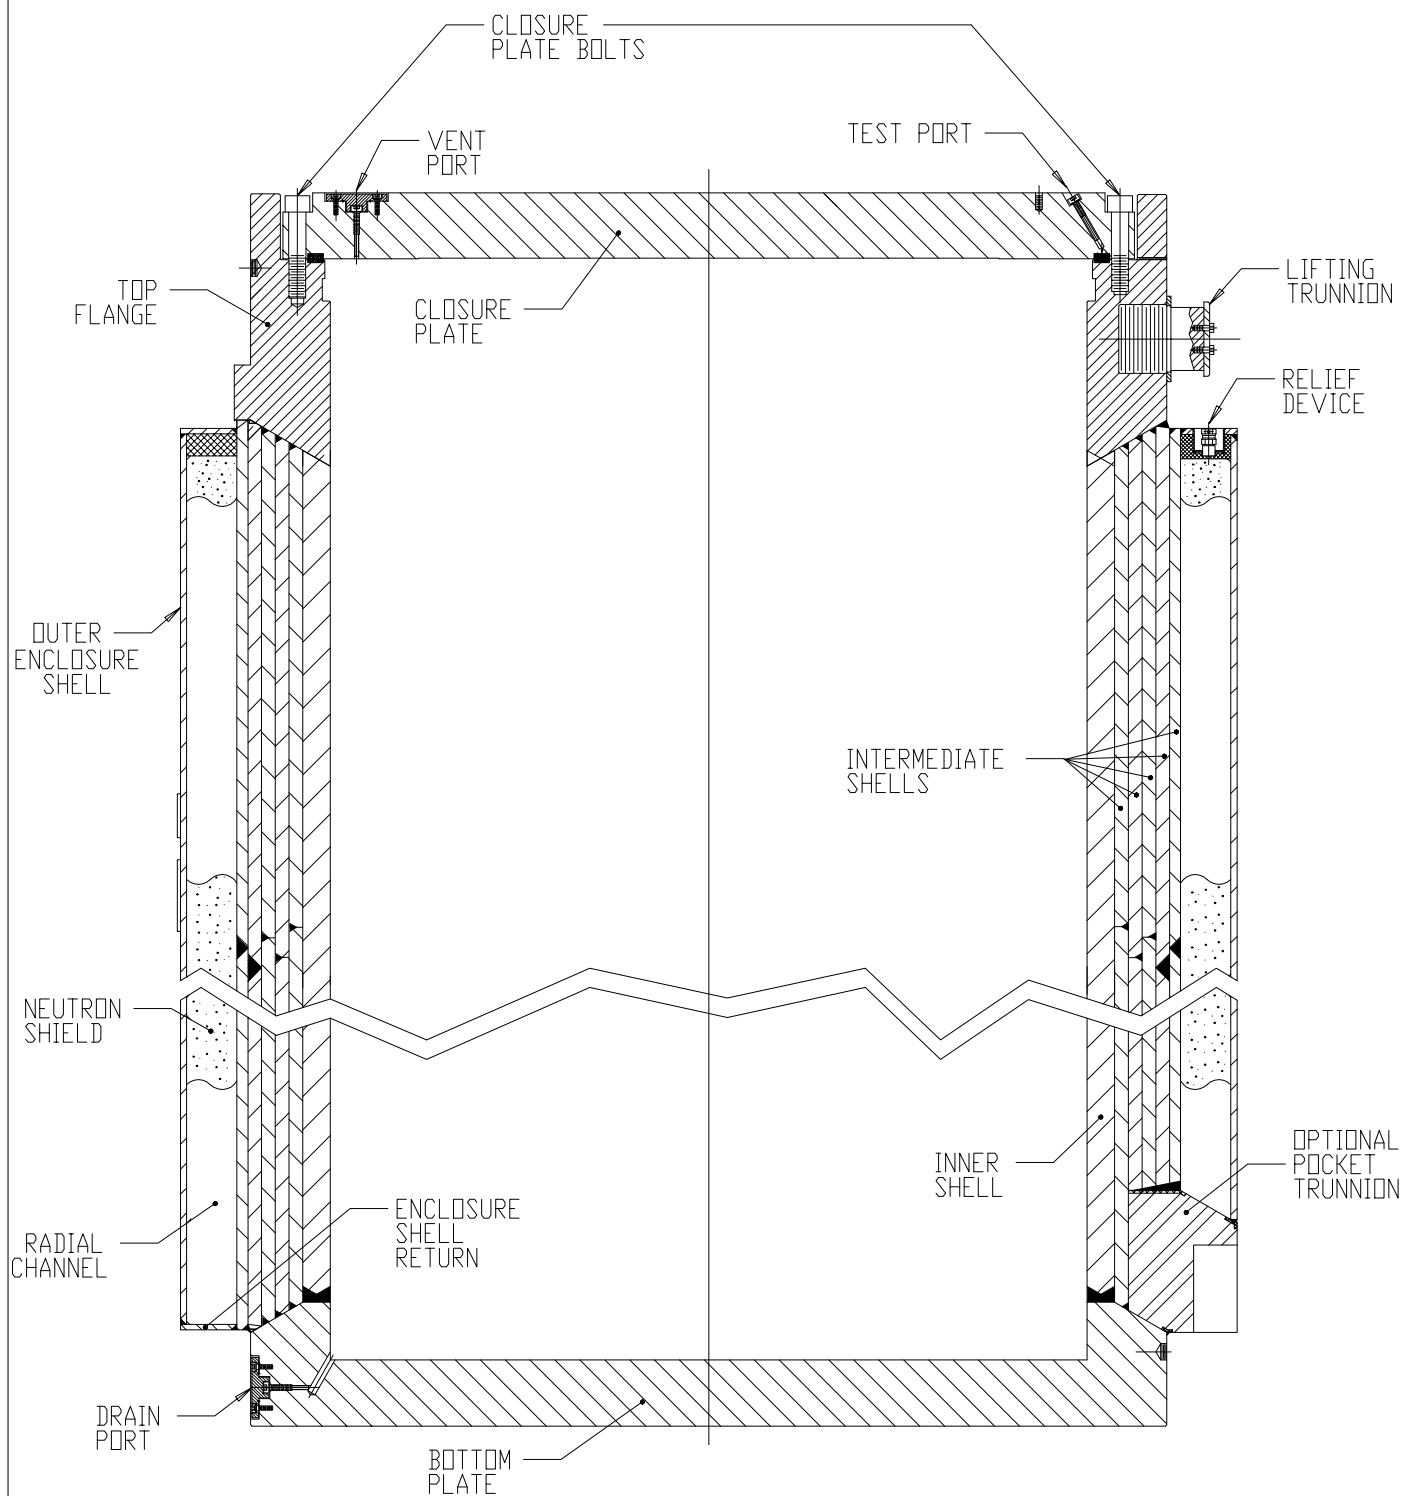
; CROSS SECTION ELEVATION VIEW OF OVERPACK
